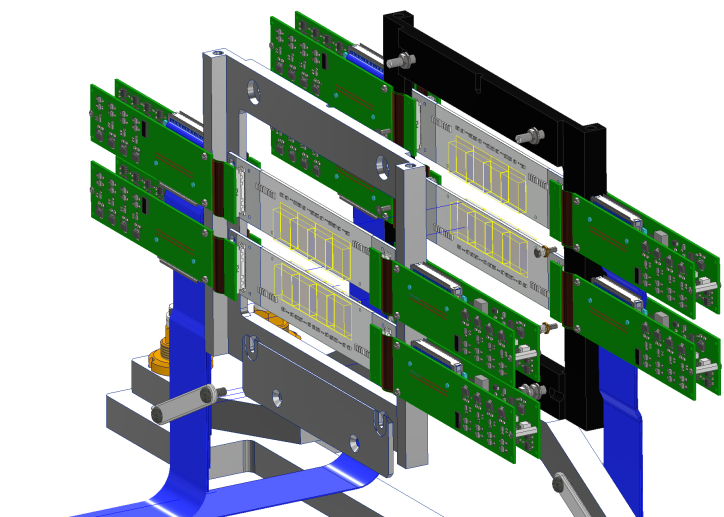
Technical drawing of the Inner Tracker in its mechanical structure.
